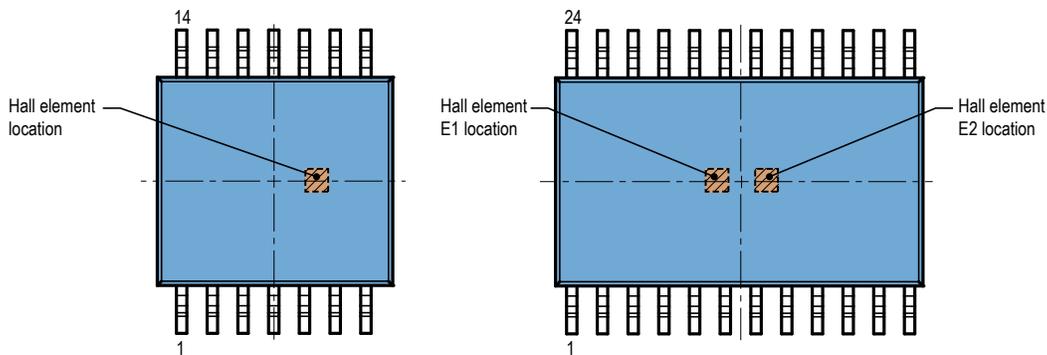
Hall element located off-center within the device body; refer to the Package Outline Drawing for reference dimensions
